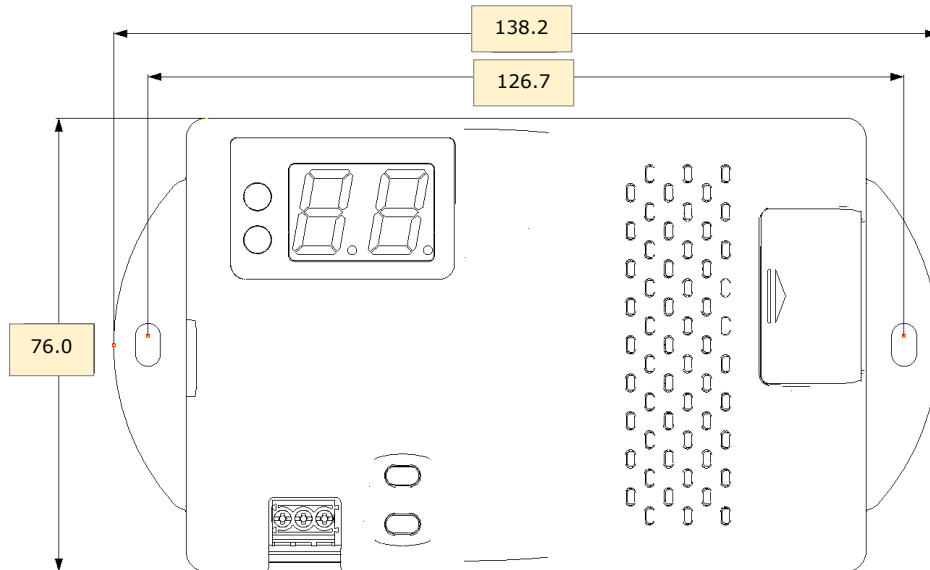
Modbus Trailing Edge Light Dimmer Dimension – Top View
